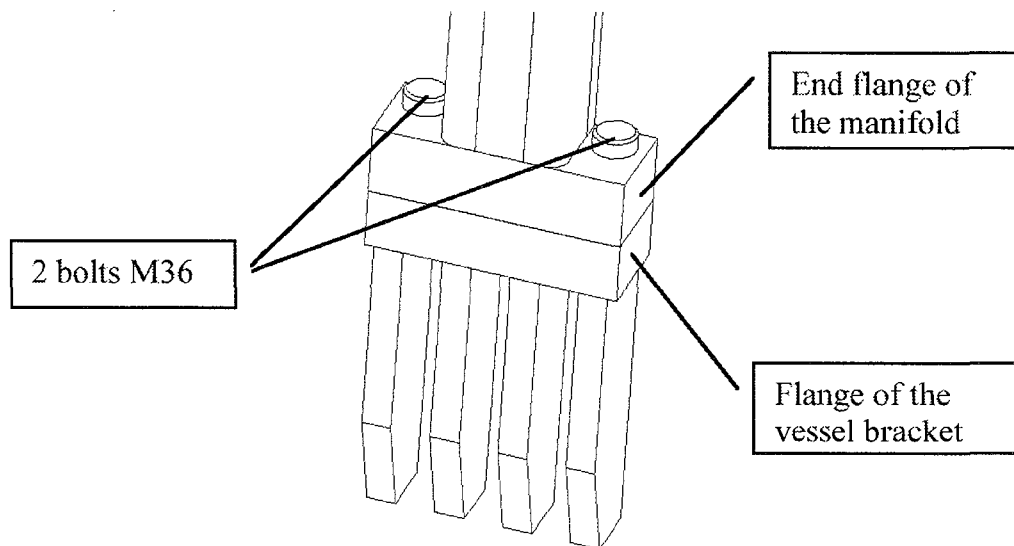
The bolted lower end supports of the outboard manifolds.
